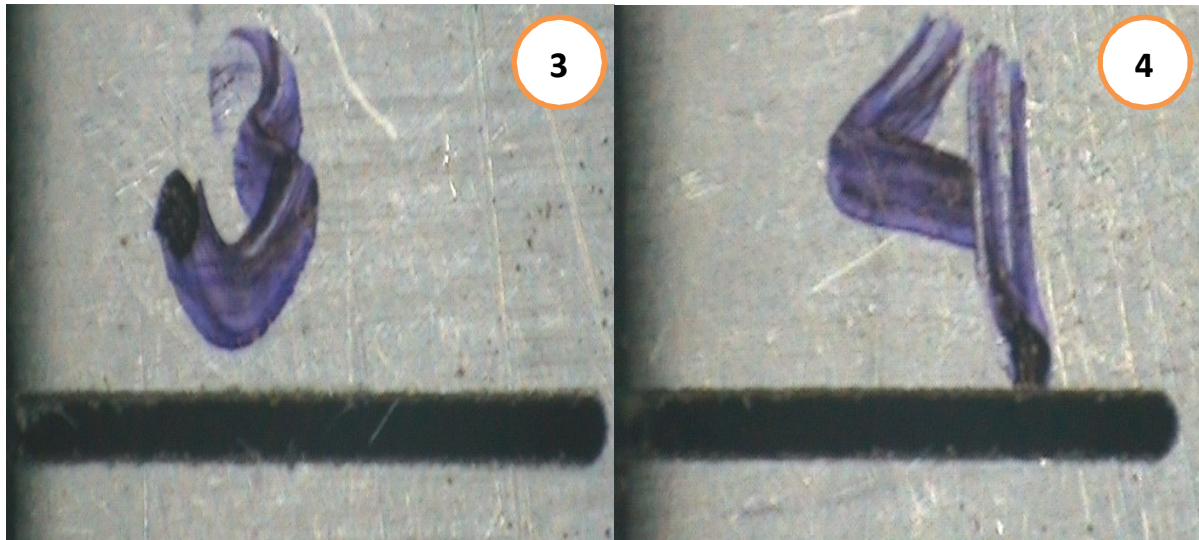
workpiece after machining on Inconel 718 with different parameter settings
